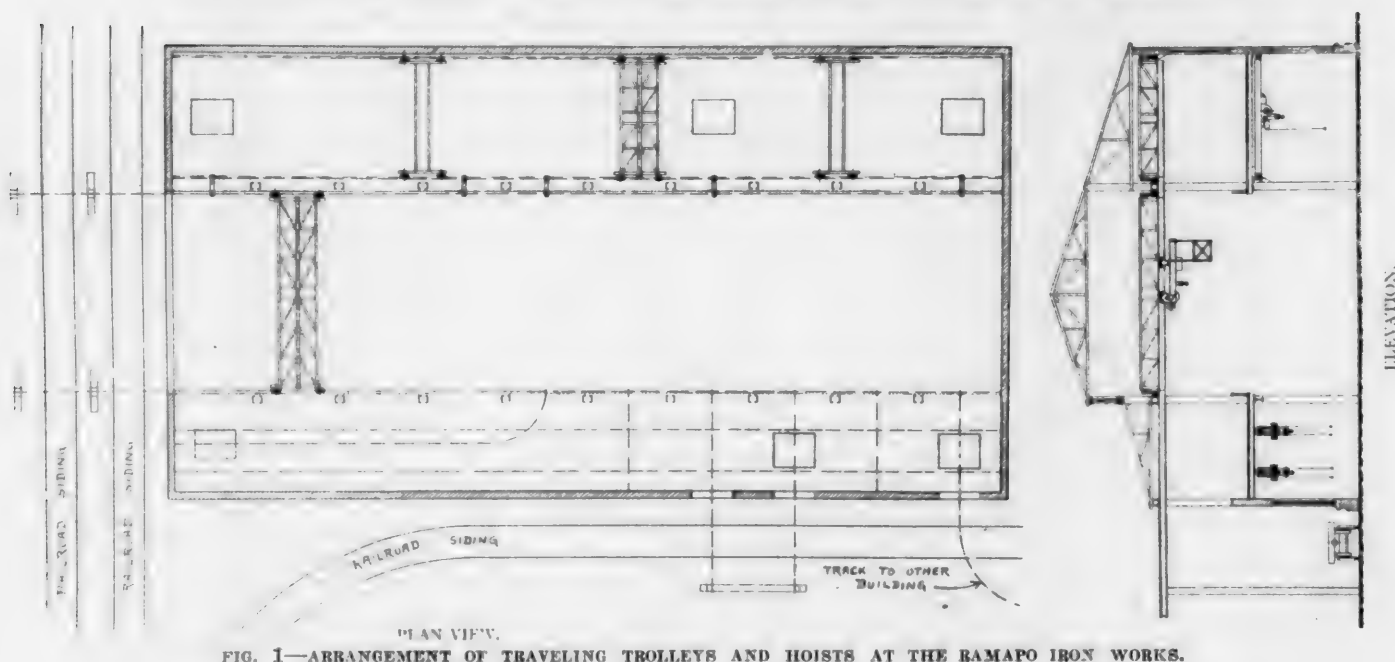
ARRANGEMENT OF TRAVELING TROLLEYS AND HOISTS AT THE RAMAPO IRON WORKS.
